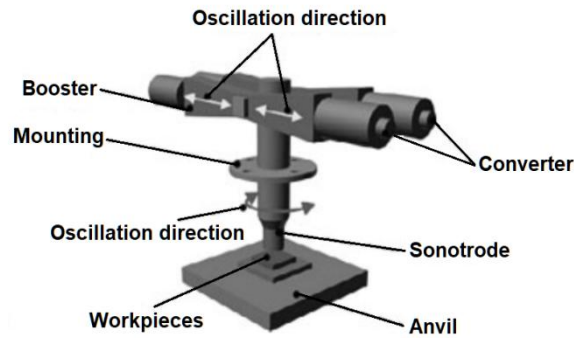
Ultrasonic torsion welding machine (Born C., 2003)
